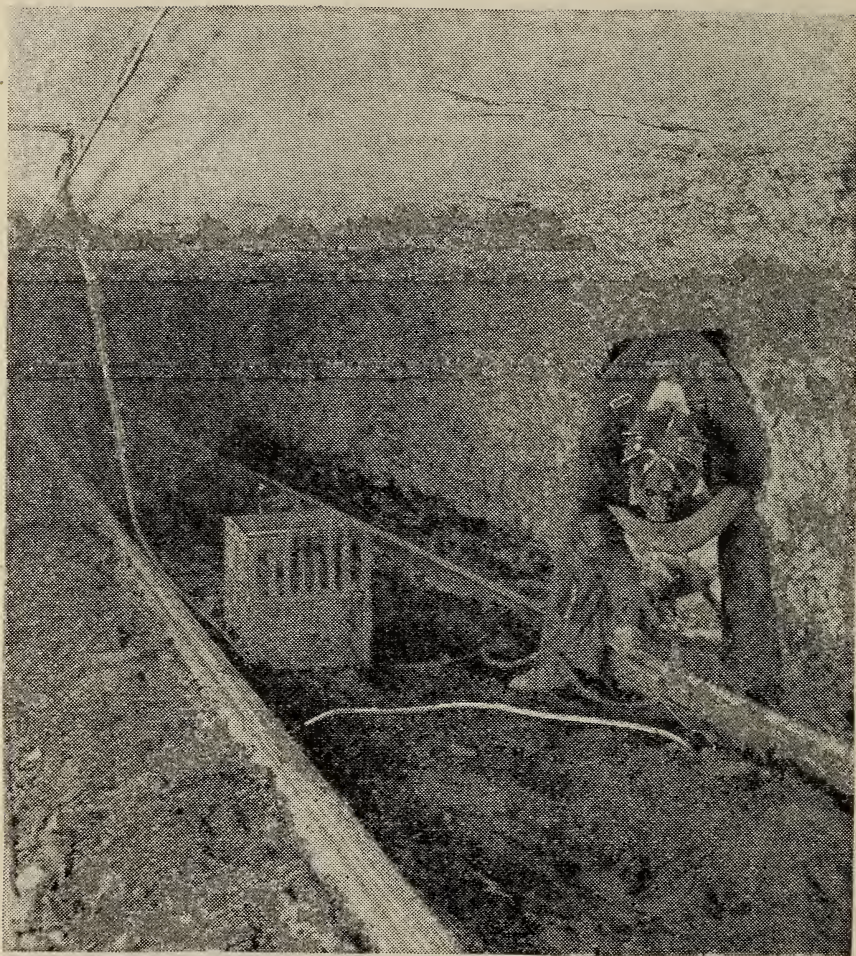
Where bonding is done by electric arc, eyes and face must be protected by a welder's shield. Heavy rubber gloves will protect hands and guard against electric shock.
